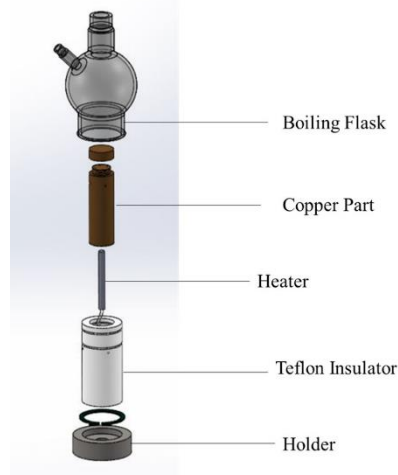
An exploded view of the section containing the heating surface, the boiling flask and the heater.
